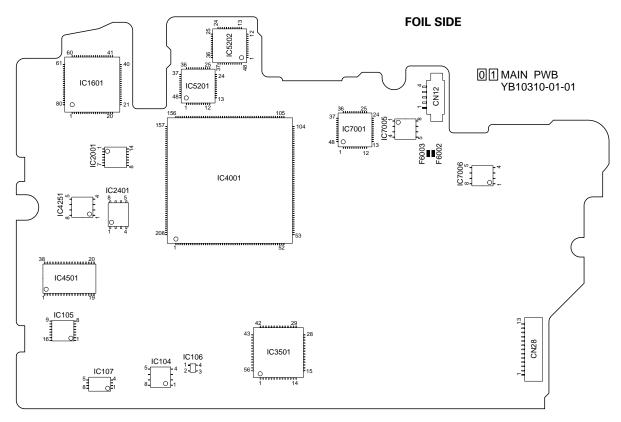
FUSE location for MAIN board assembly (FOIL SIDE)
